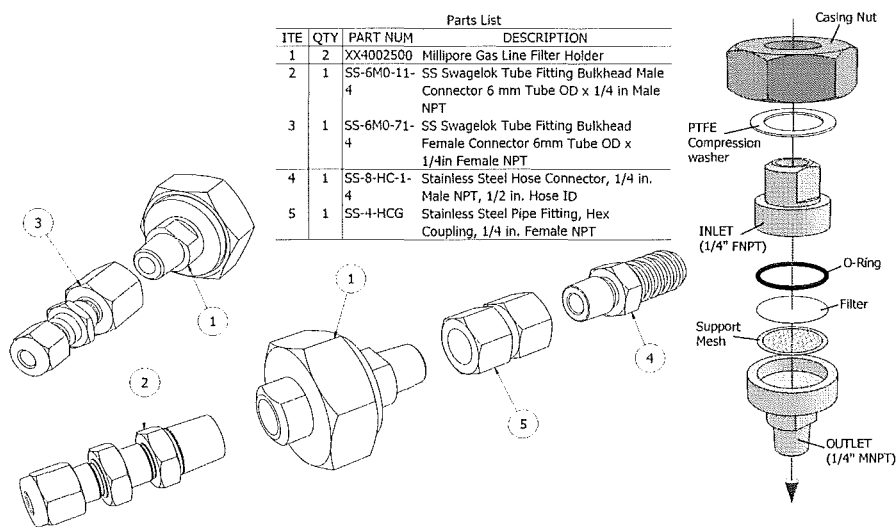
Technical exploded diagram showing the air filtering arrangement used.
